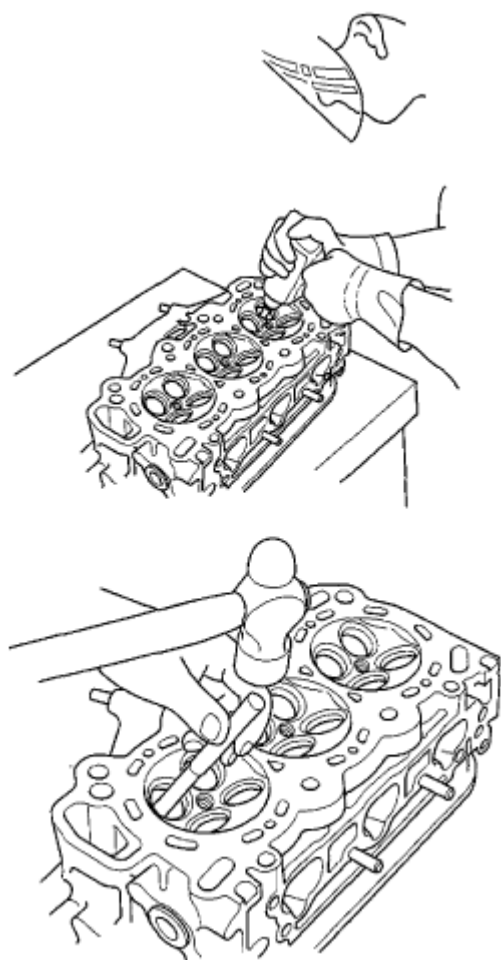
Driving Guide Towards Combustion Chamber Using Driver And Air Hammer
